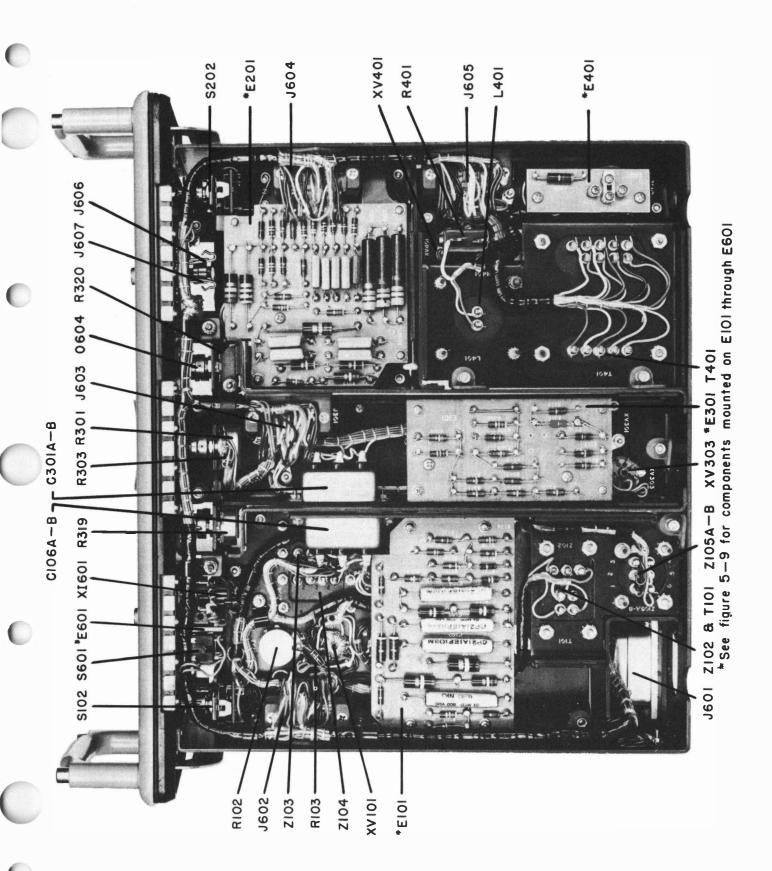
Frequency Shift Converter CV-89A/URA-8A, Bottom of Drawer Assembly Chassis
